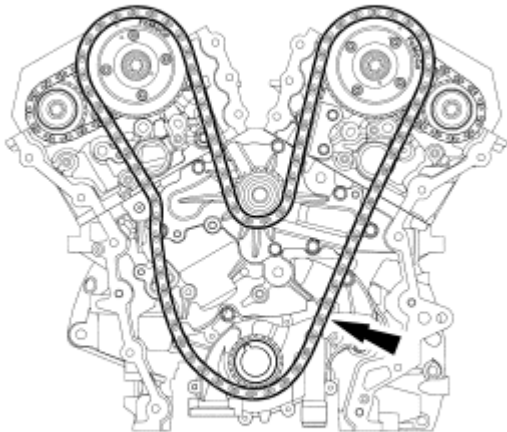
Locating Lower LH Primary Timing Chain Guide Bolts
